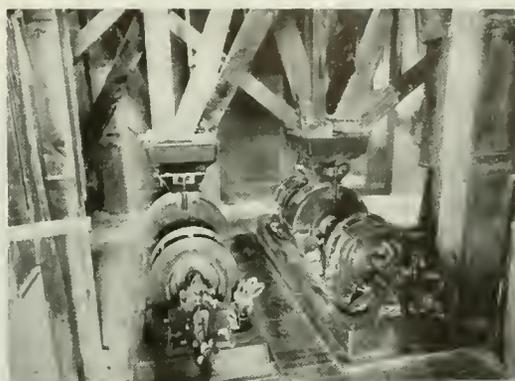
Two 20-h.p., 1800-r.p.m., 440-volt, Form K Motors Driving 24-in. Double End Attrition Mill
